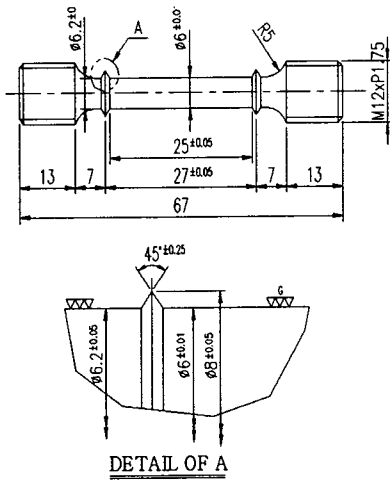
Shape and dimension of creep specimen (ASTM E139-83) (unit : mm)
